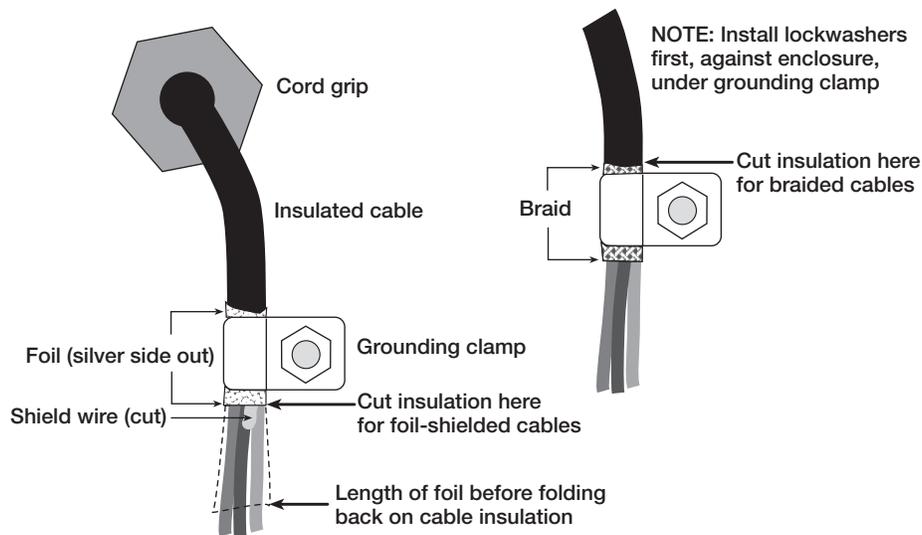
Grounding Clamp Attachment for Foil-Shielded and Braided Cabling
